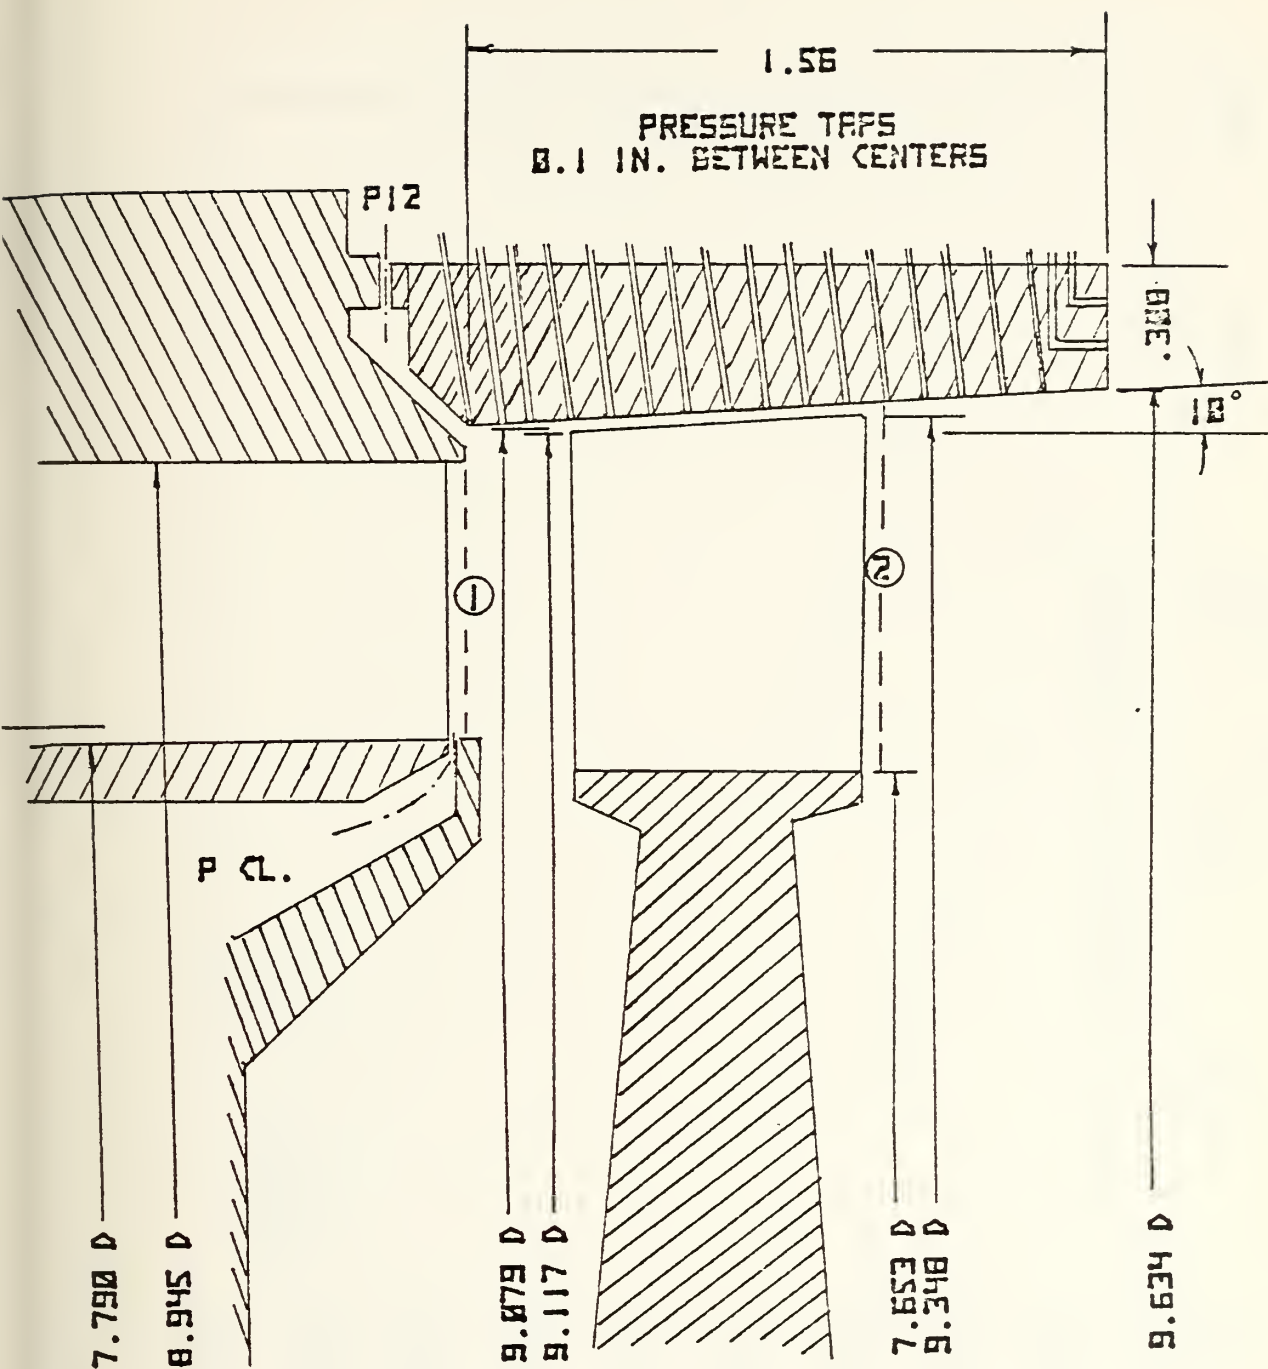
TURBINE TEST RIG GEOMETRY FOR
